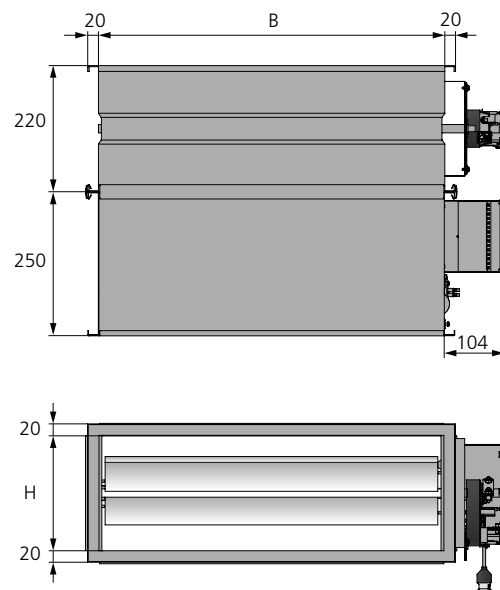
Dimensions, WISE Damper rectangular and WISE Damper rectangular with spring return.
